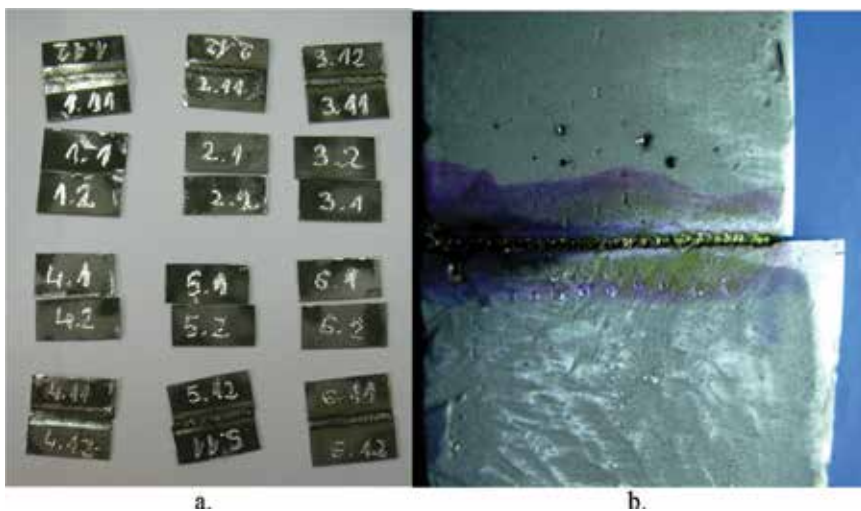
(a) The casted plates. (b) Plates after welding.
